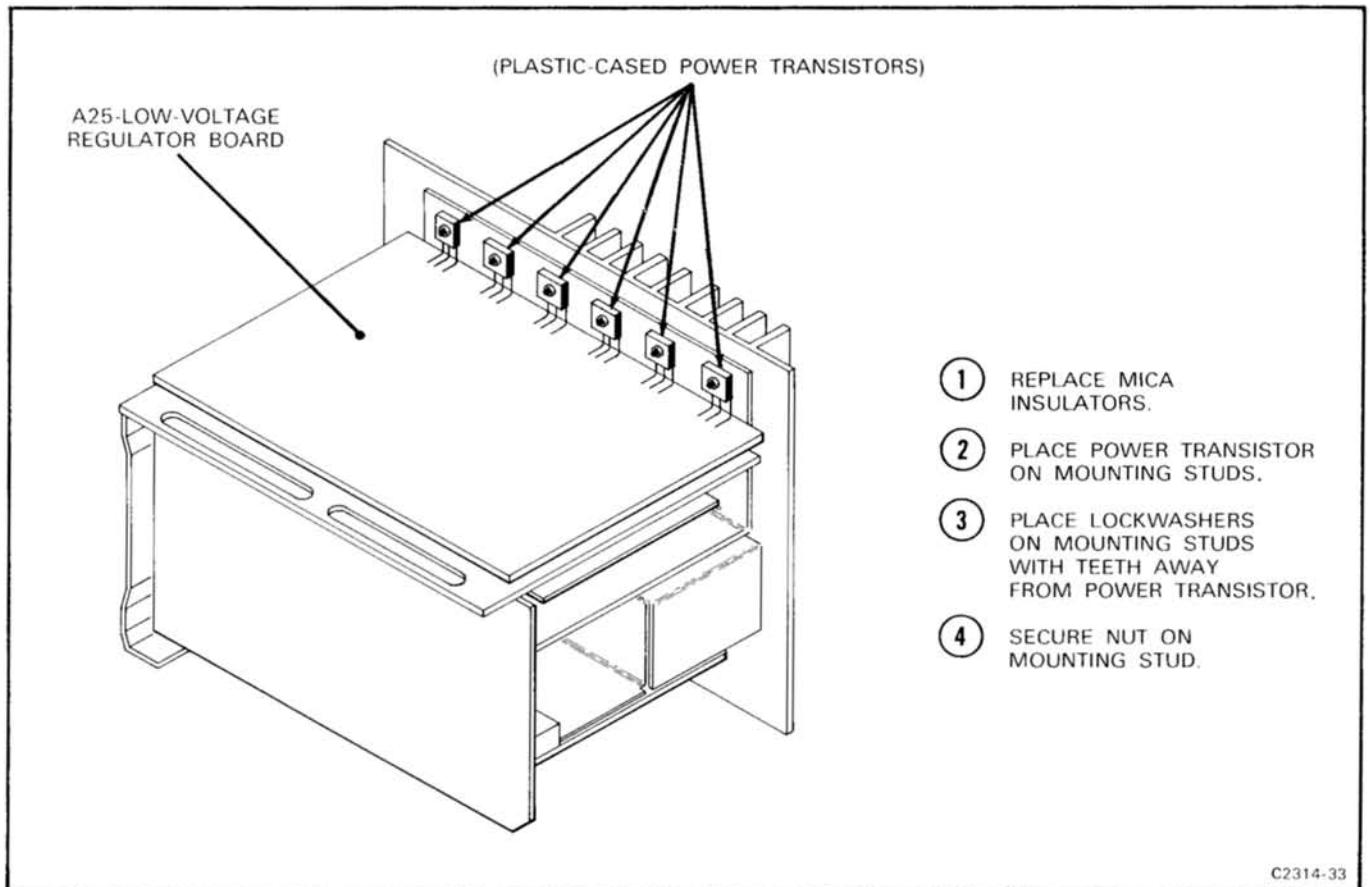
Correct placement of power transistor and mounting hardware on rear heatsink.
